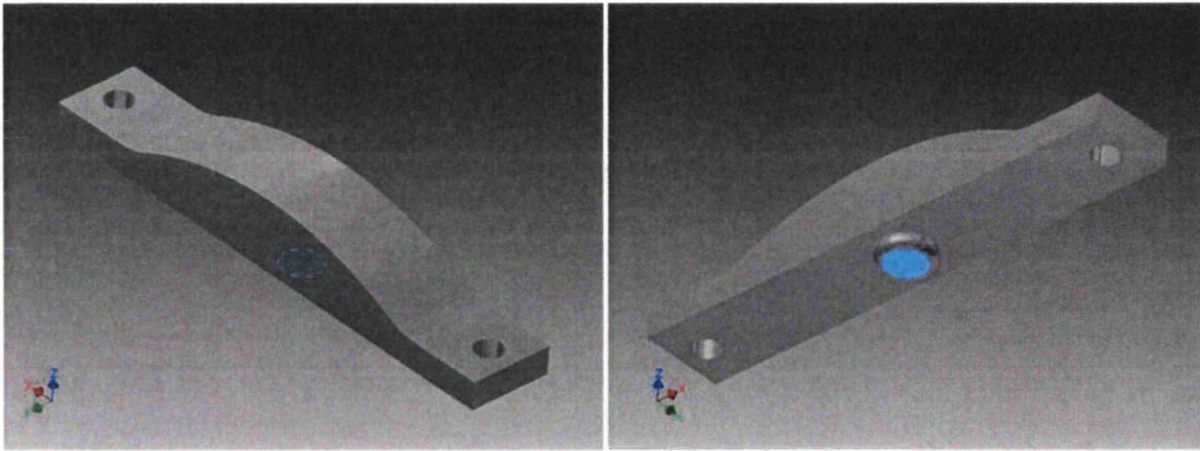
CAD drawing of clamping Plates created in AutoDesk Inventor.
